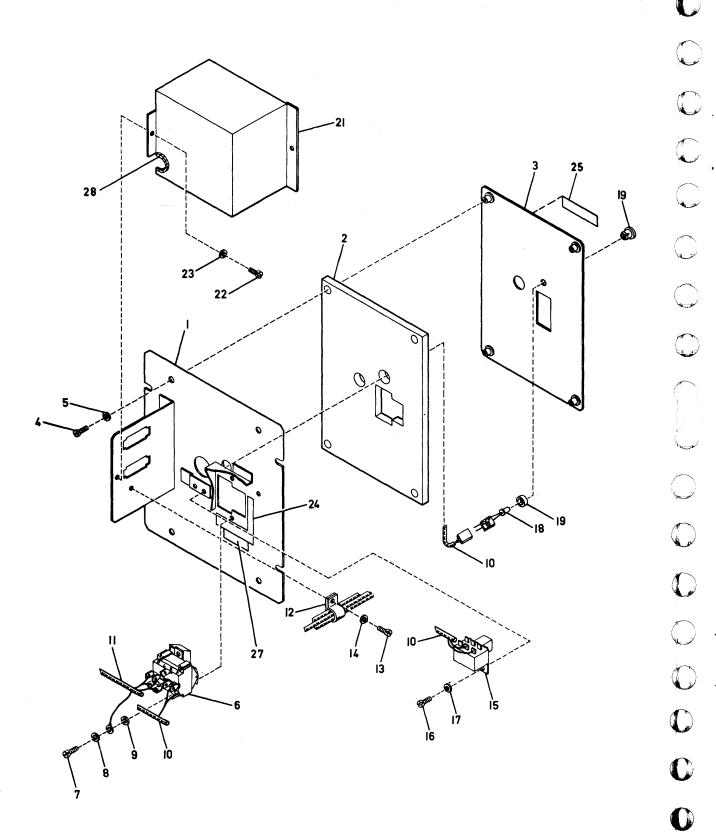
CUSTOMER PANEL ASSEMBLY (SHEET 1 OF 2, INDEX NO. 1 THRU 28)
